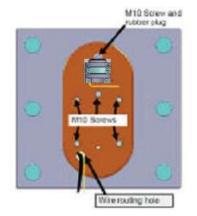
Mark and drill 6 mounting holes using 5/32-inch wood drill bit.
